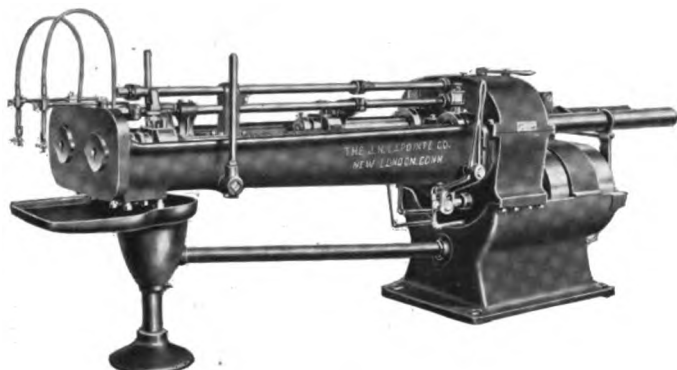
J. N. Lapointe Company Double 3 Broaching Machine
